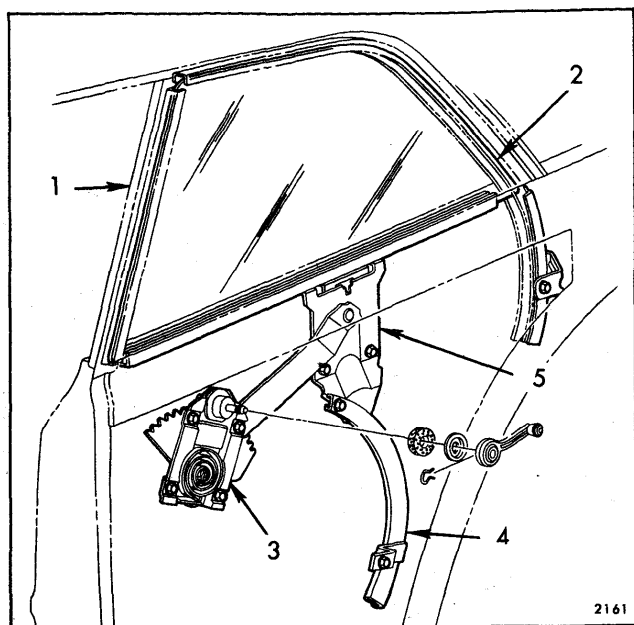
Rear Quarter Hardware - "X-11" Style
